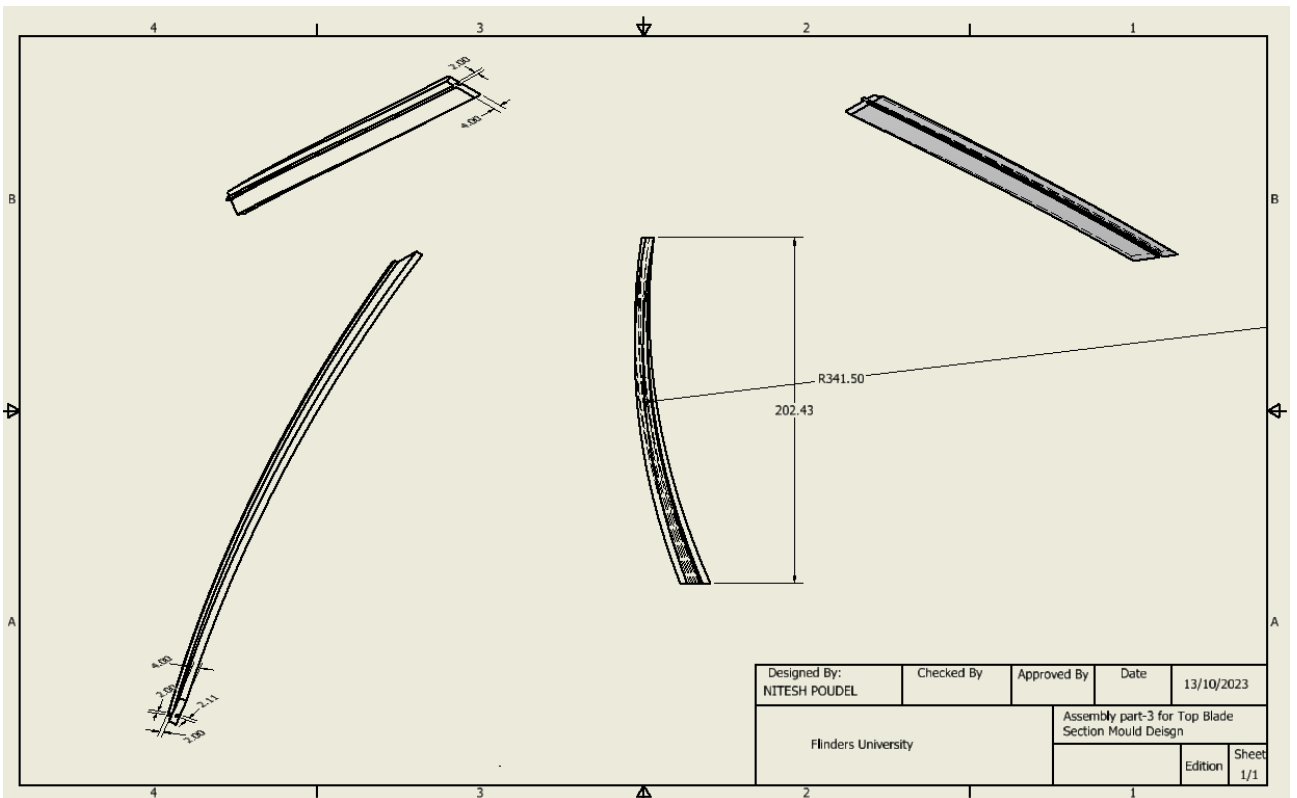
Assembly part-3 for Top Blade Section Mould Design
